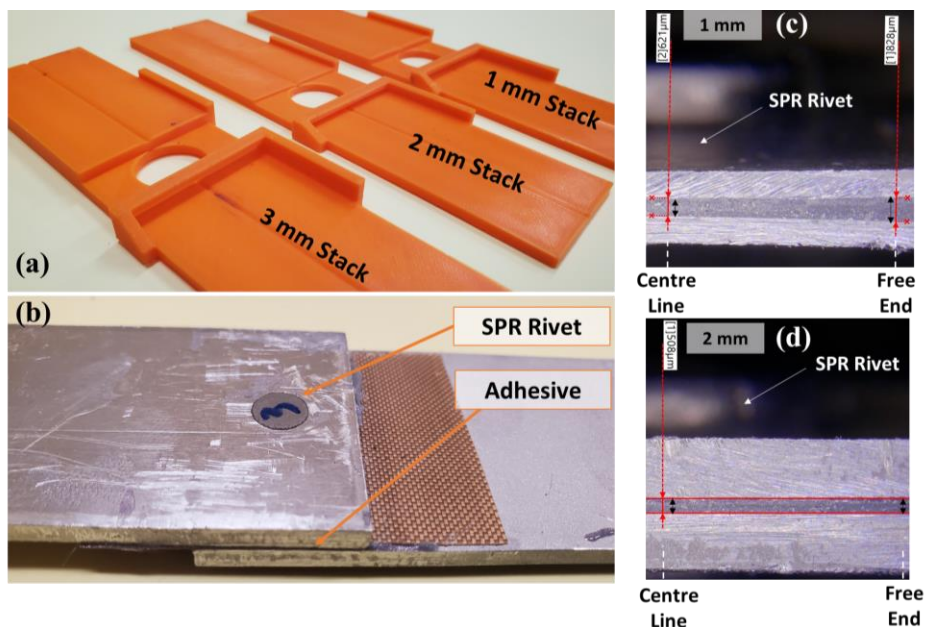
(a) 3D printed assembly template for SPR and hybrid joints, (b) Hybrid joined SLJ specimen, (c-d) hybrid joining affecting bond line thickness depending on sheet thickness.
